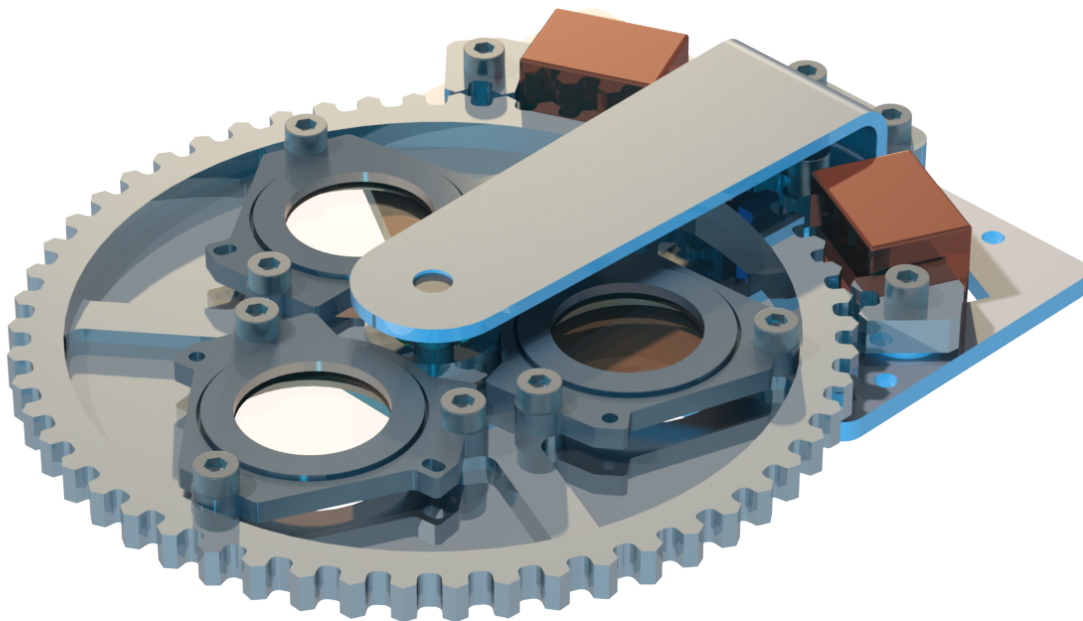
The filter wheel concept with integrated rotational hybrid linear stepper motor.
